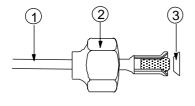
Style 50 (incl. valve depressor mounted into machined flare)
